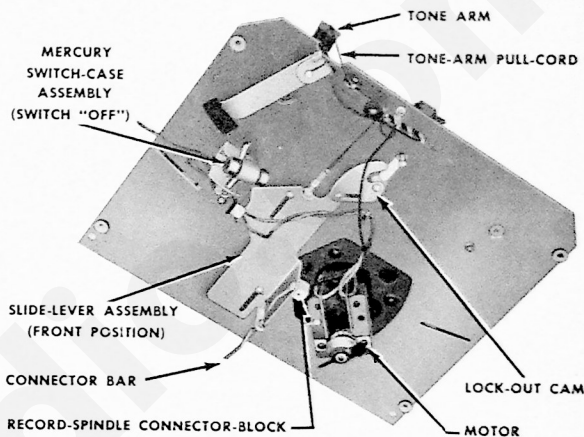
BOTTOM VIEW, COMPONENTS IN OPEN-DOOR POSITIONS, WITHOUT RECORD.
